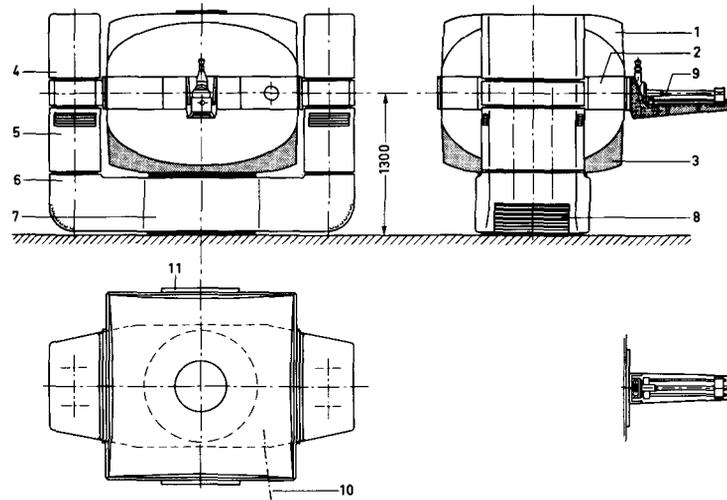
Views of the cyclotron. 1. Upper yoke; 2. Centre yoke and vacuum chamber; 3. Lower yoke; 4. rf generator; 5. Diffusion pump; 6. Mechanical pump; 7. Auxiliary equipment; 8. Ventilation; 9. Target lock and insertion equipment; 10. Beam transport piping; 11. Window
